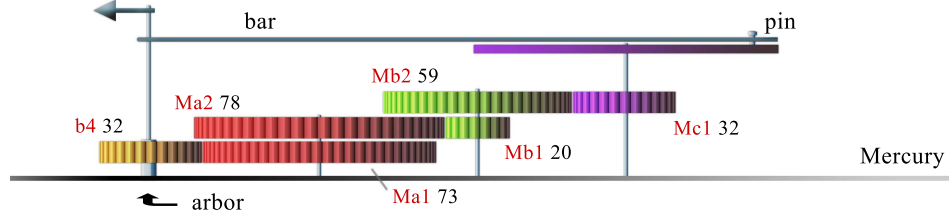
Side view of the schematic gearing diagram of the Mercury epicycle gear train, which is mounted on top of the rotating 224-teeth Sun Wheel. Shown are the gears, their tooth counts, and their relative position. The train begins with a fixed 32-teeth gear, and ends with a circular dish on which a pin is mounted. This pin pulls the bar along, which in turn leads the Mercury pointer around the dial.
